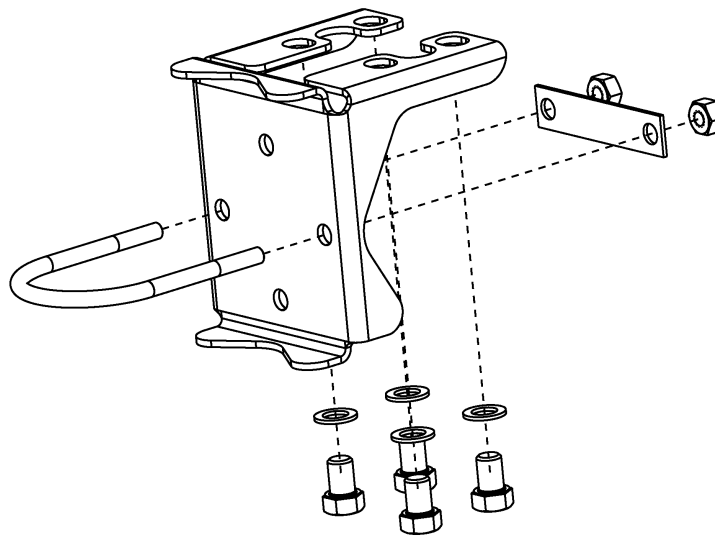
Panel mounting bracket option codes B2 and B8
